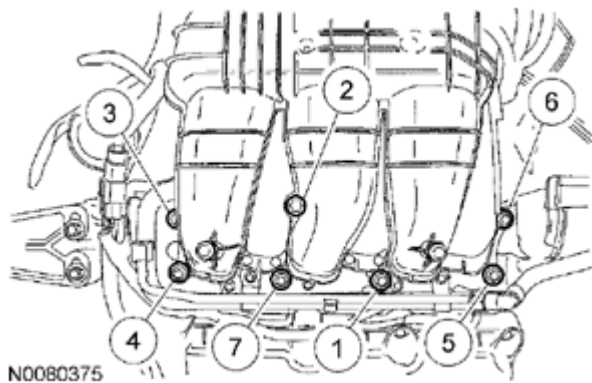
Identifying Upper Intake Manifold Bolts Tightening Sequence
